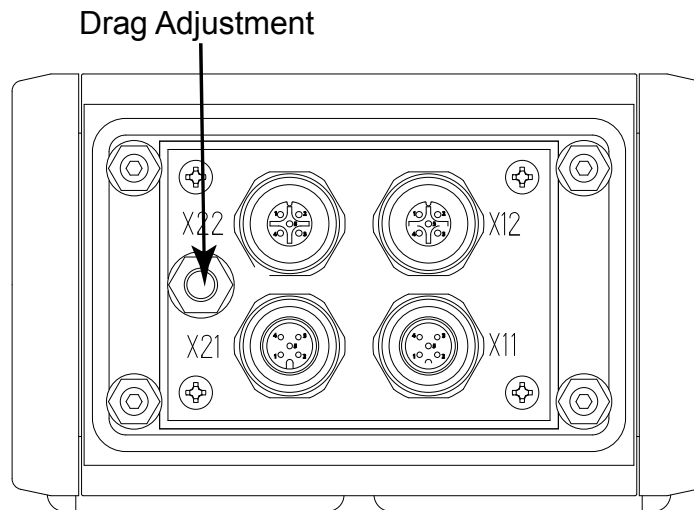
Drag Adjustment Screws for Single/Dual Lever Digital Control Head
